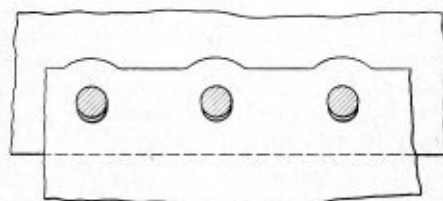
Failure Due to Stretching of Rivet Holes
